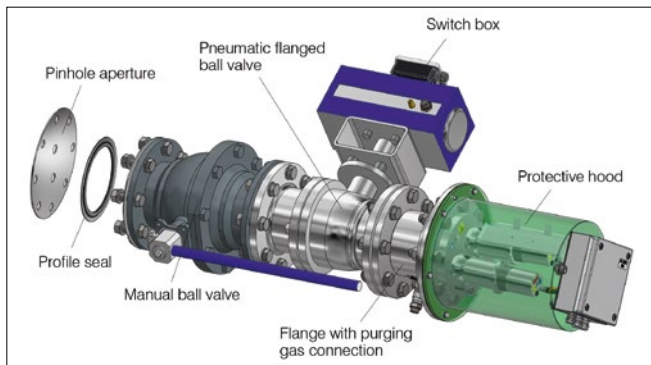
Mounting fitting consisting of protective hood, flange with pressure-resistant window and purge gas nozzle, pneumatic valves, manual valve and pinhole aperture
